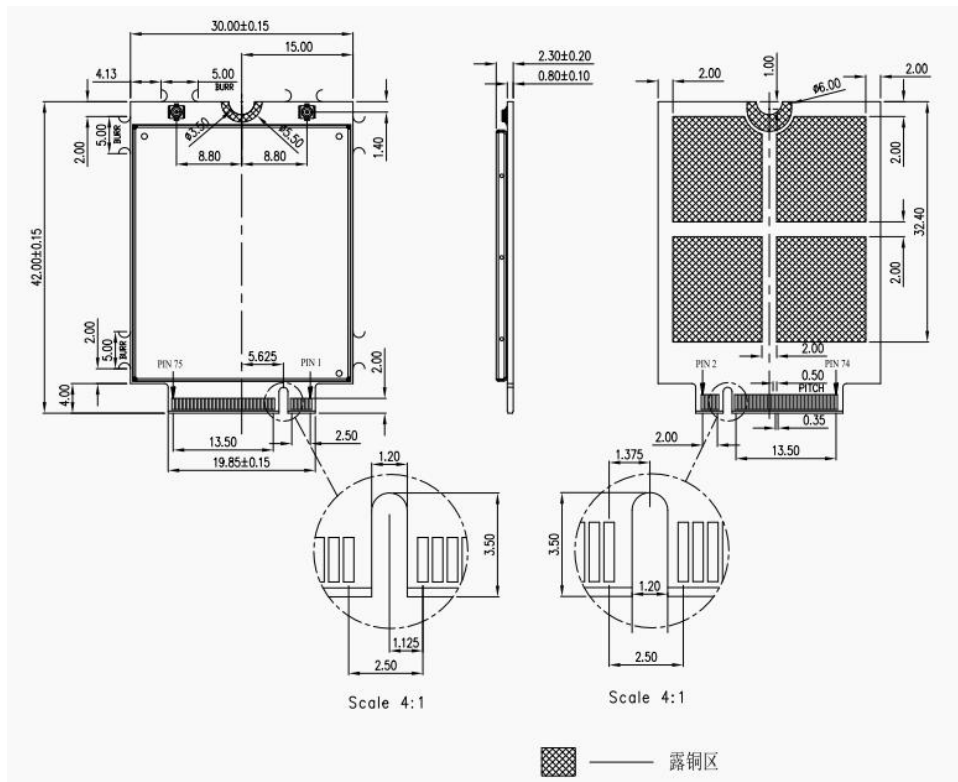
Dimensions of SIM6600-M2 (Unit: mm)
